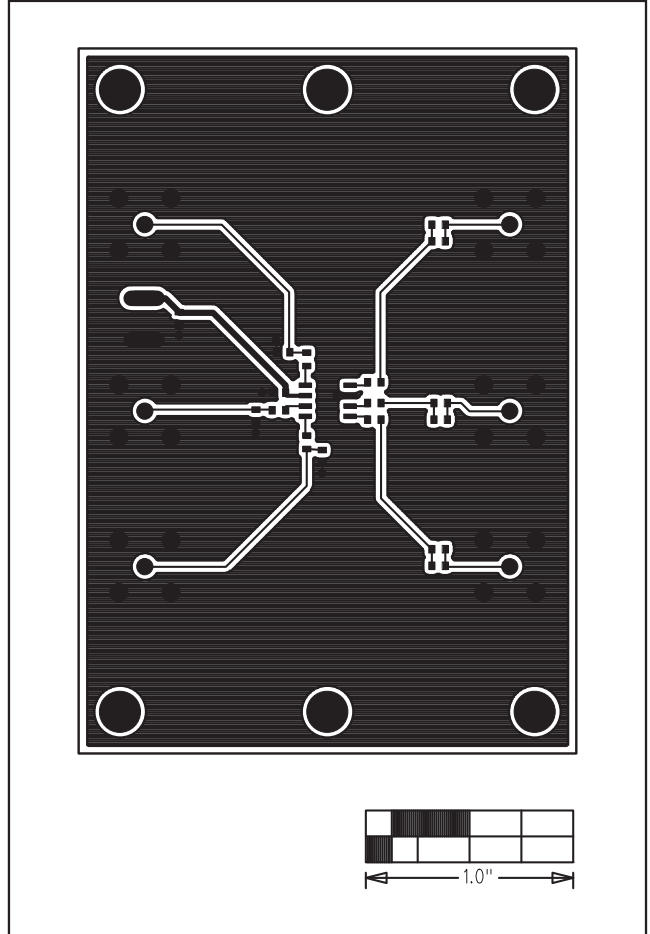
MAX9652 EV Kit PCB Layout—Component Side
